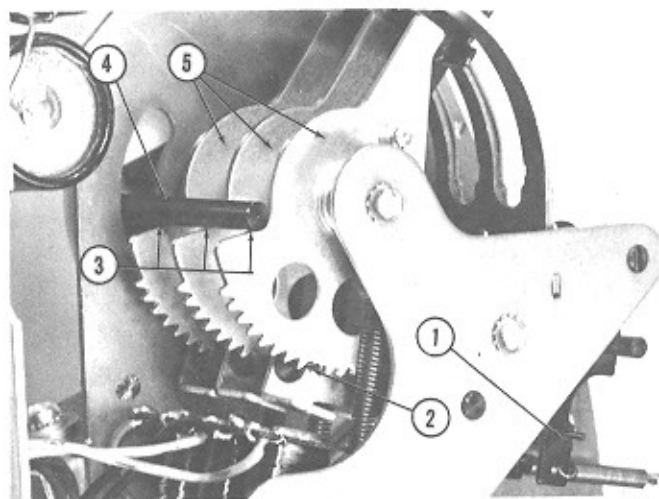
STOP LEVER & QUADRANT INDEXING STRIP ADJUSTMENT
